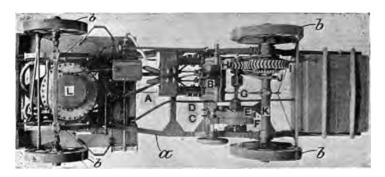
Thornycroft steam omnibus. Underside view of transmission gear.
